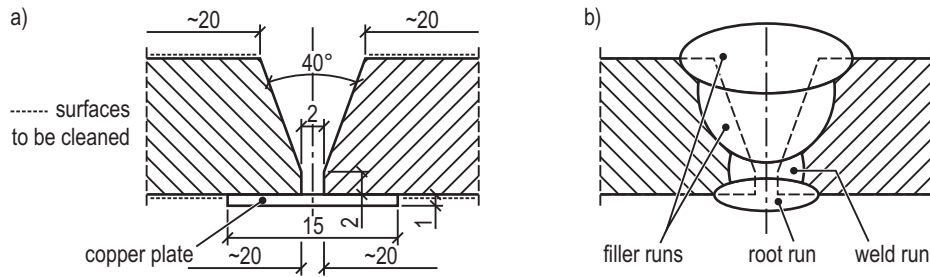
The diagram of butt weld joints: edges preparation (a) and sequence of weld runs (b)
